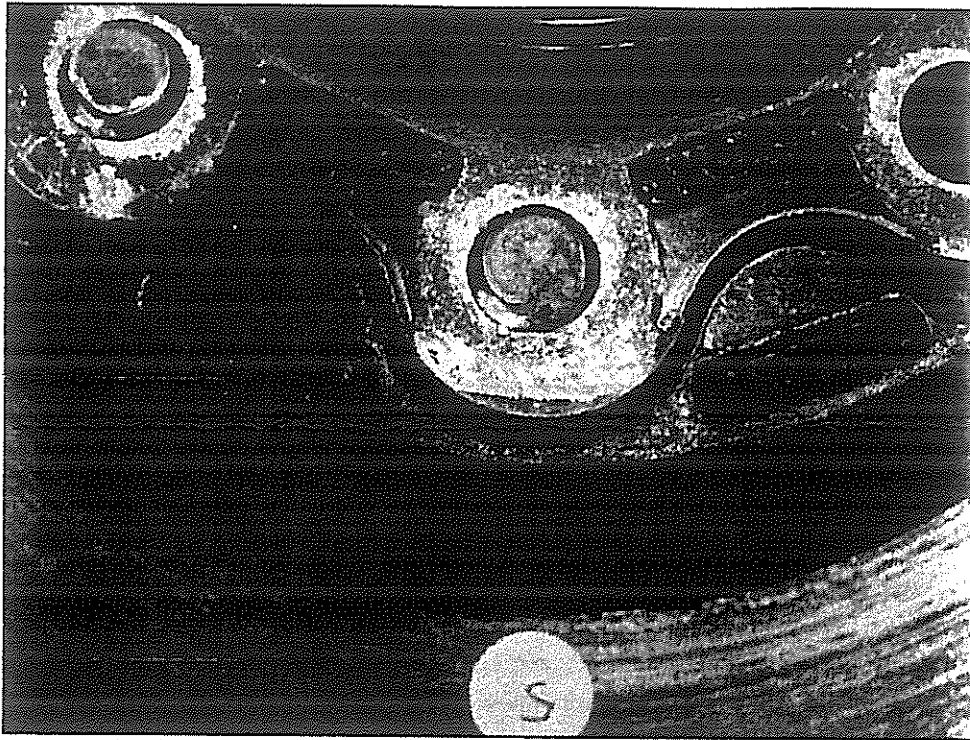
Showing the location of fracture on bolts 5 and 6 was at the thread runout – edges of the bolts to the taper were damaged by looseness of the wheel
